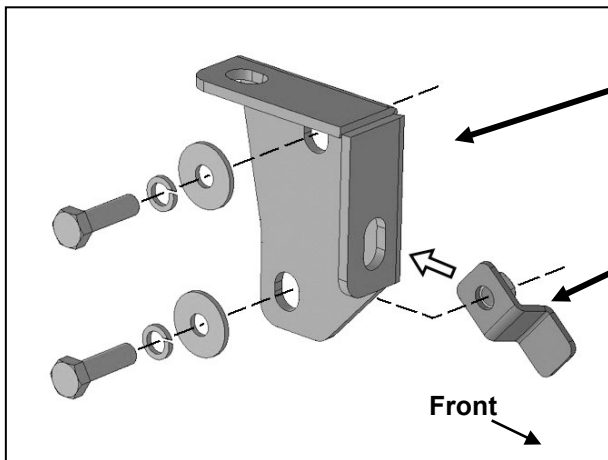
JK Models: Attach driver/left Support Bracket to inner side of frame. Insert Nut Plate into opening in frame
